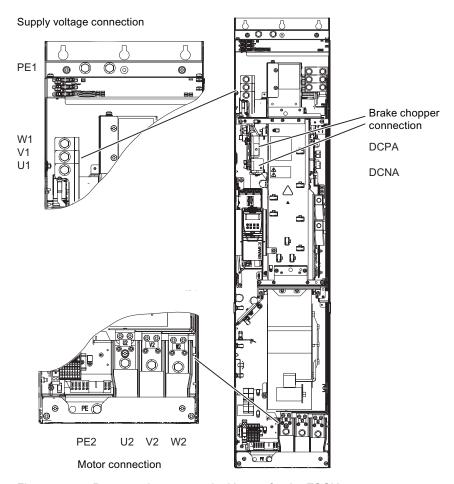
Power and motor terminal layout for the FSGX M10 tightening torque: 25 Nm/18.4 lbf.ft
